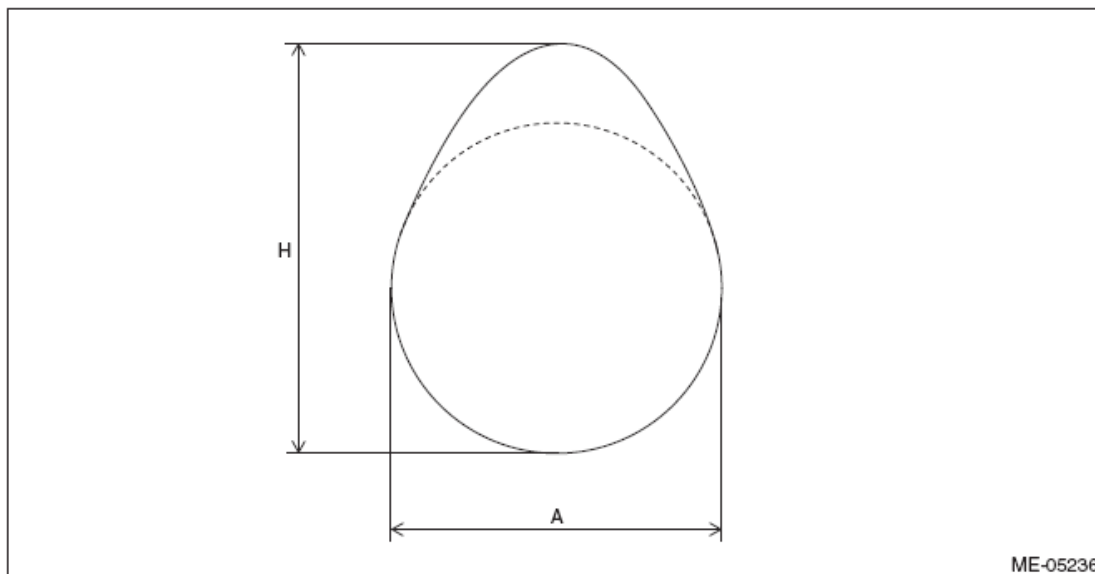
Identifying Camshaft Cam Base Circle Diameter
